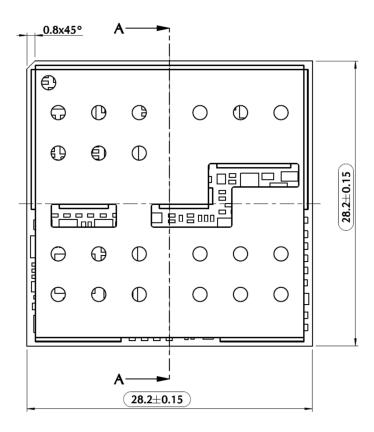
LE910Cx-WWX Mechanical Dimensions (Bottom View)
